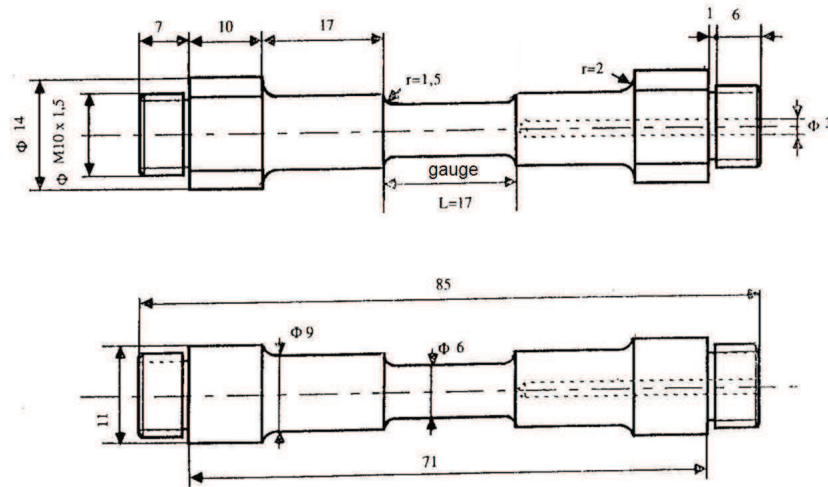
Geometry and dimensions in *mm* of torsion samples.
